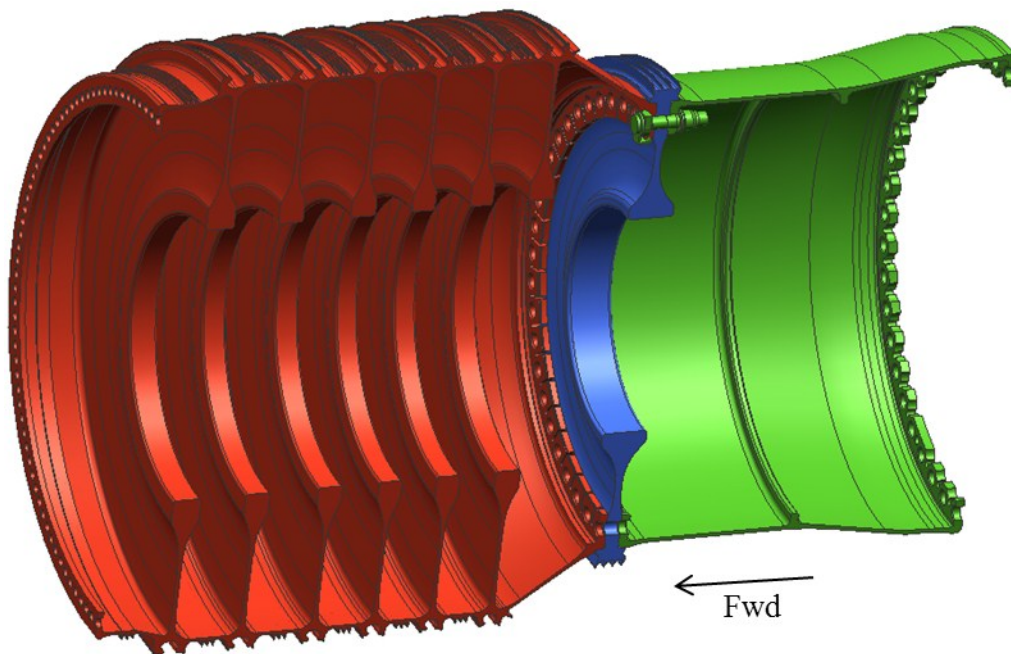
Cut-away view of compressor spool (red), compressor discharge piston (CDP) seal (blue), high pressure turbine (HPT) front shaft (green). Only a single bolt/nut is shown.
